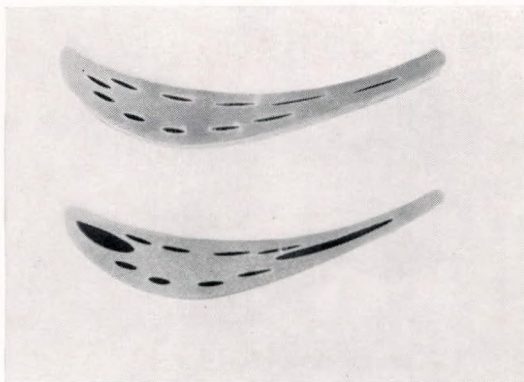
Sections of hollow gas-turbine blading produced by hot extrusion
